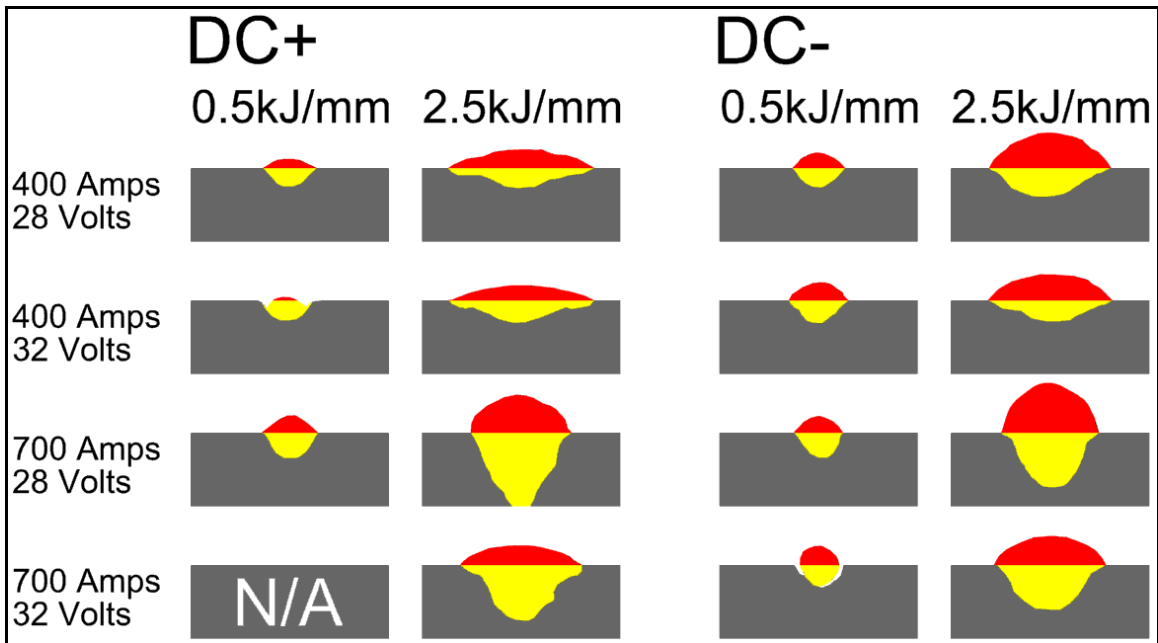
Group 1 DCEP and DCEN Weld Bead Cross-Sections
